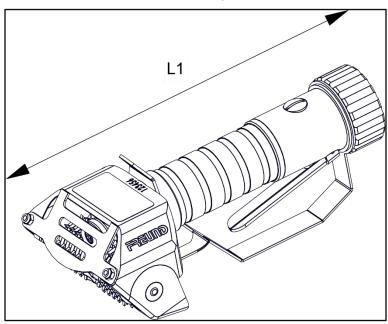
Mounted Hand-Skinner HSK8-P5
